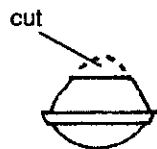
On 2.6 liter 109 chassis, leave headlamps in position but cut nipple on right front lamp housing.
